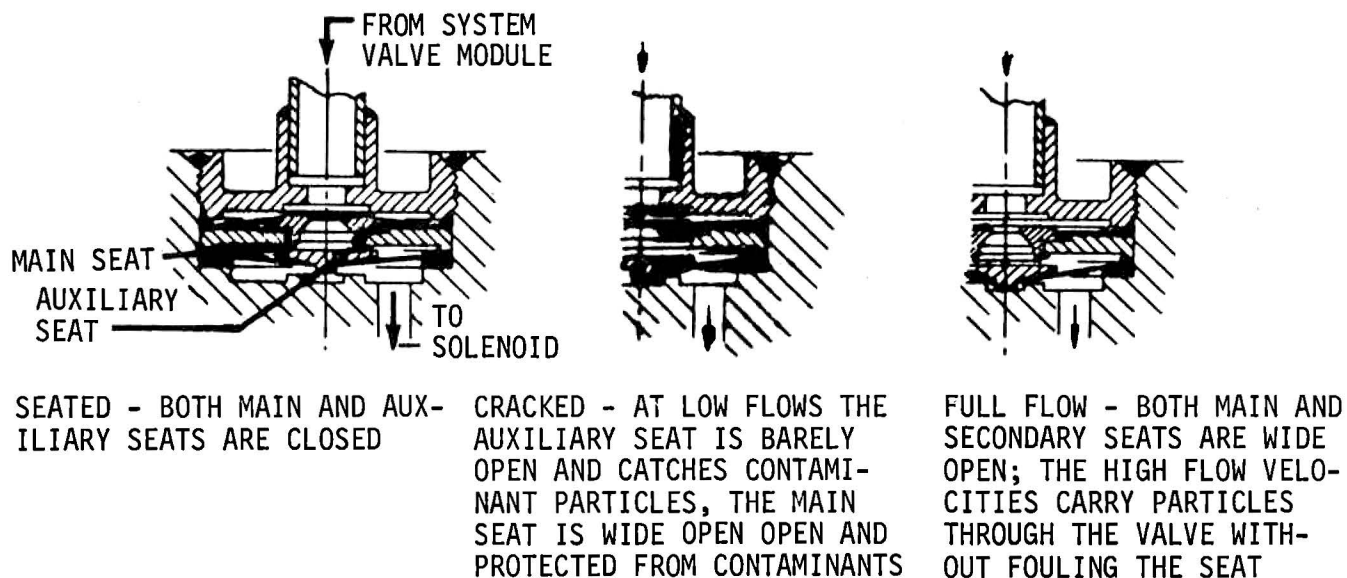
FUEL CELL MODULE CHECK VALVE
